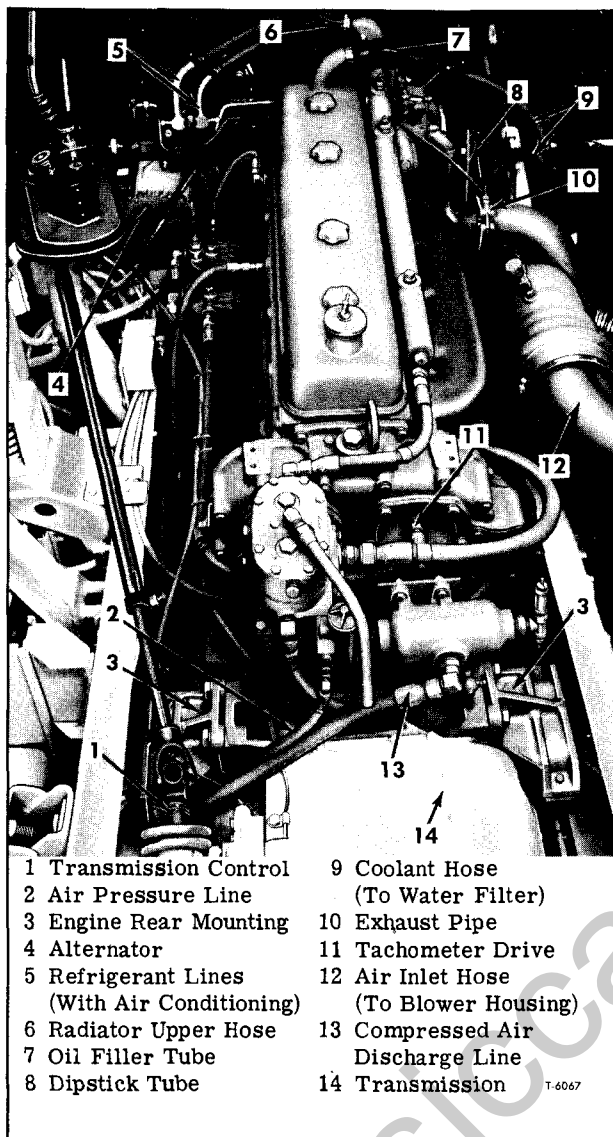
6-71 Diesel Engine Installed (Tilt Cab) (Typical)
